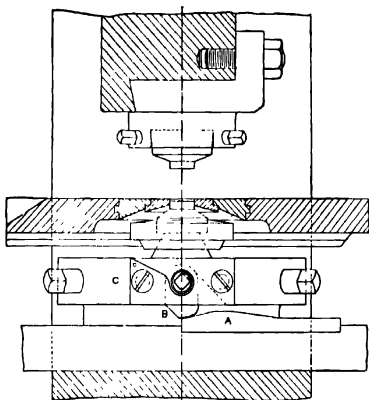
High-speed extractor mechanism of Taylor & Challen coining press
